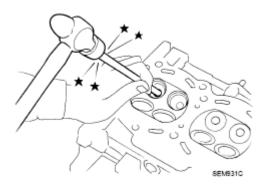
Removing Valve Guide Using Hammer And Valve Guide Drift Courtesy of NISSAN MOTOR CO., U.S.A.
